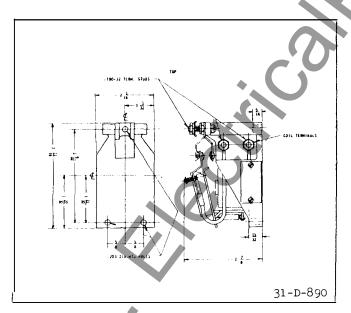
Outline and Drilling Plan for the Open Type SG Auxiliary Relay with Reversible Contacts. For Reference Only.
